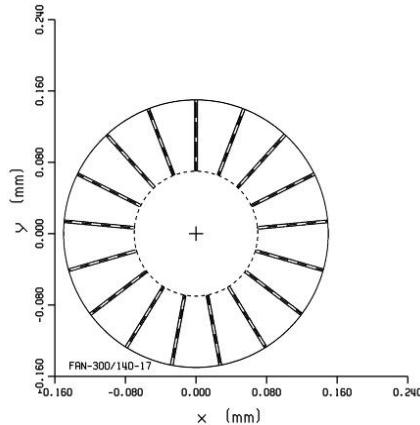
Drawing of the radial flow fan-impeller with straight cylindrical blades viewing from rotational axes
